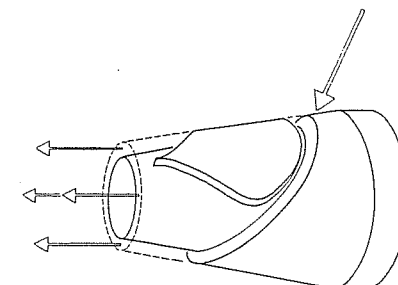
Mandrel of a side-fed die with a heart-shaped manifold (principle)
